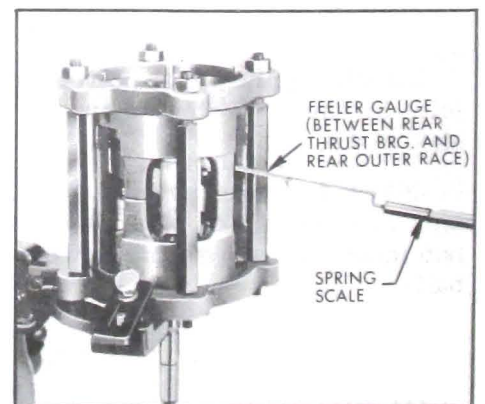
Checking Selected Feeler Gauge with Spring Scale
